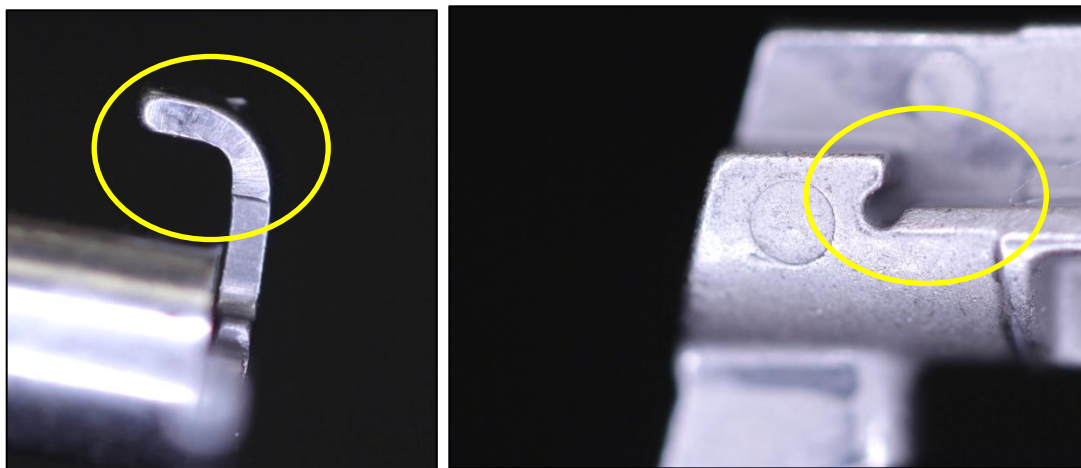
Exemplar P320 firearm - manufacturing issues with the safety lock tab (left) and the striker stop (right)
